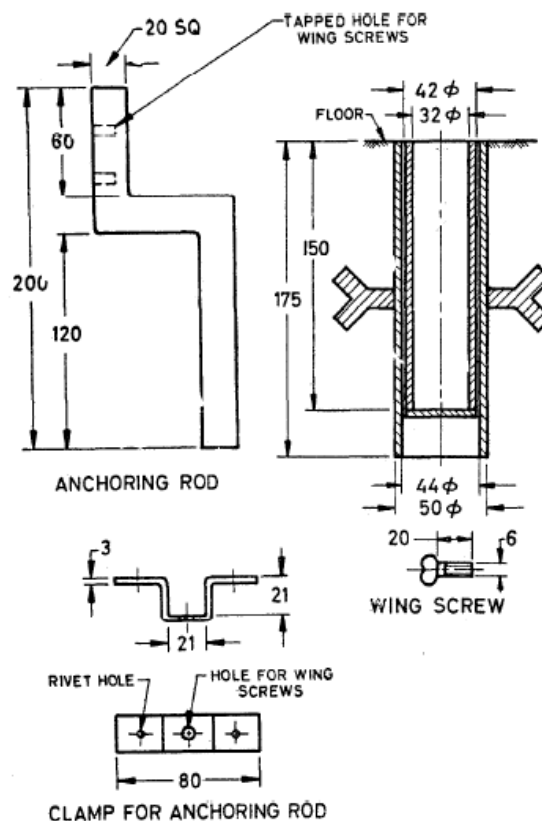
TYPICAL DETAIL OF ANCHORING ROD DEVICE
